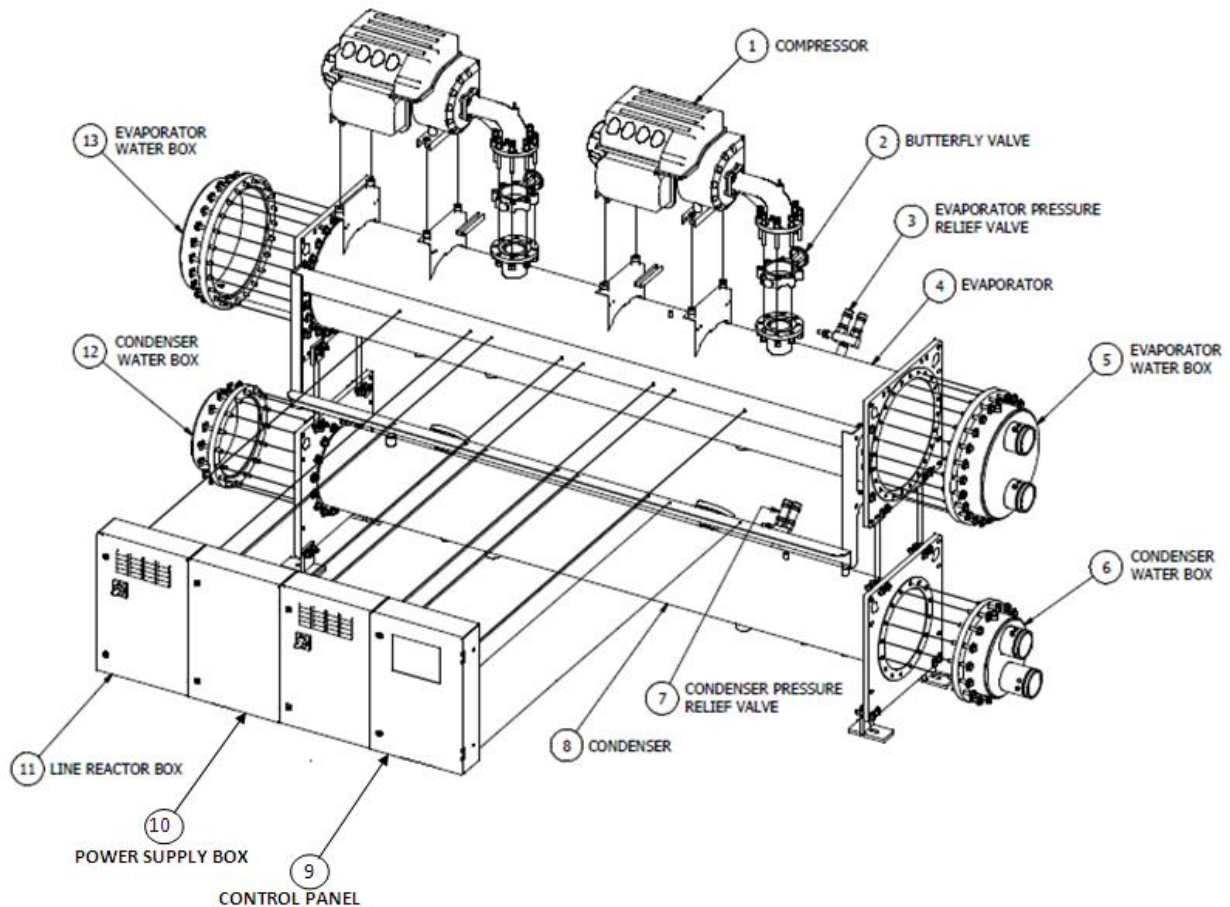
Exploded View - Water Cooled Chiller - Principal Components
